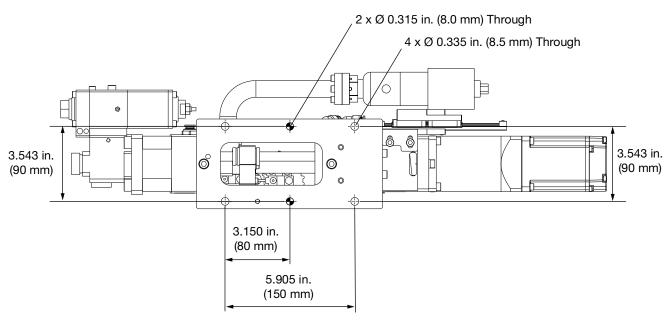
Mounting Hole Dimensions for Installing the PSM Metering Unit - 25cc
